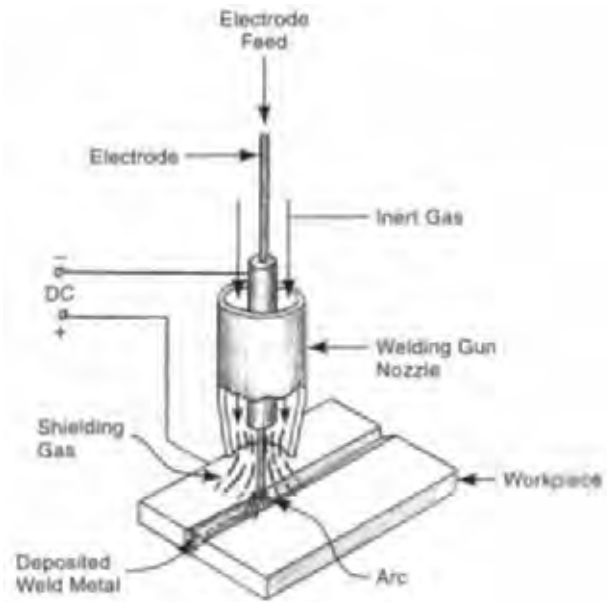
C1d Gas metal arc welding (GMAW).
